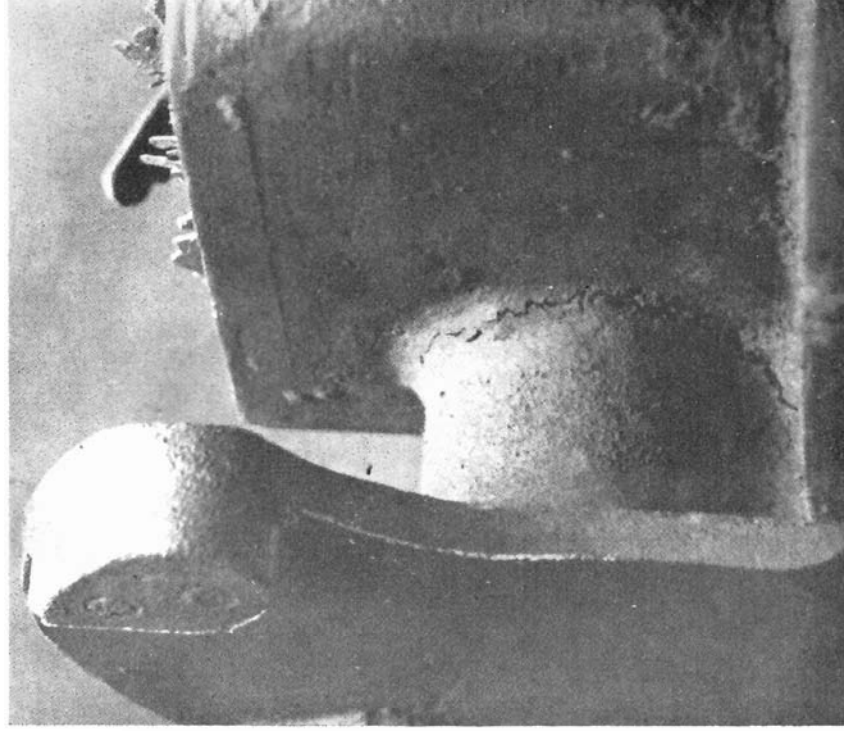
A contraction crack in the fillet of a small gunmetal sand casting.
